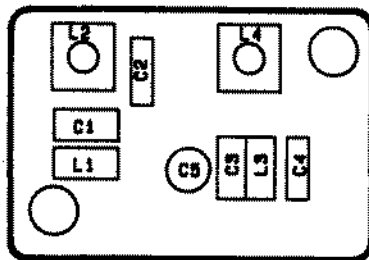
P/O 8552B Component. Assembly and Adjustment Locations (ERRATA)
